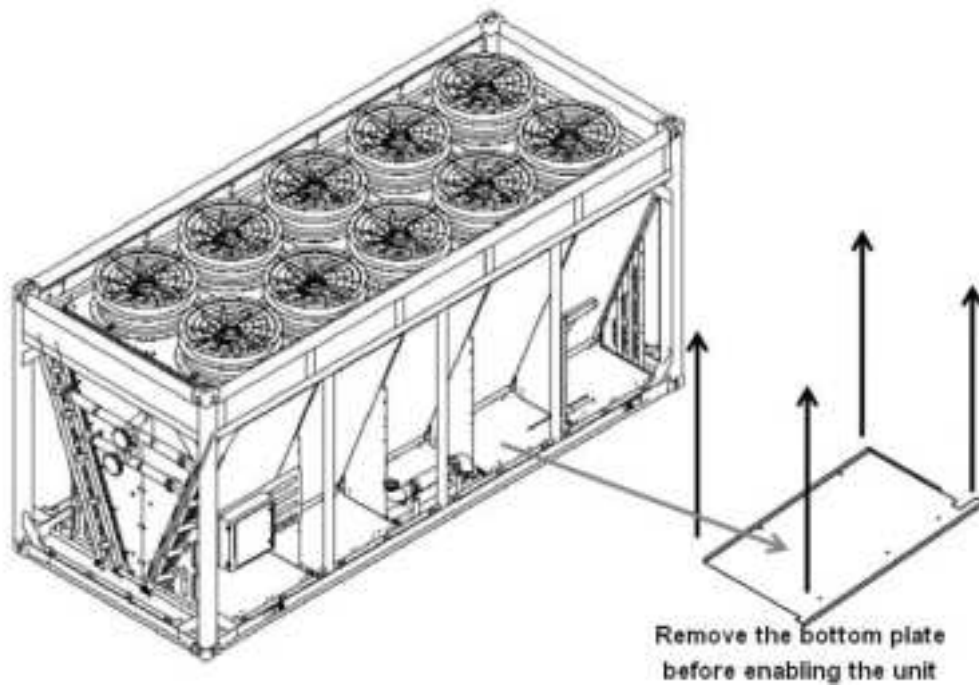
Remove bottom plate and fasteners for inlet and outlet pipe components of the dry tower
